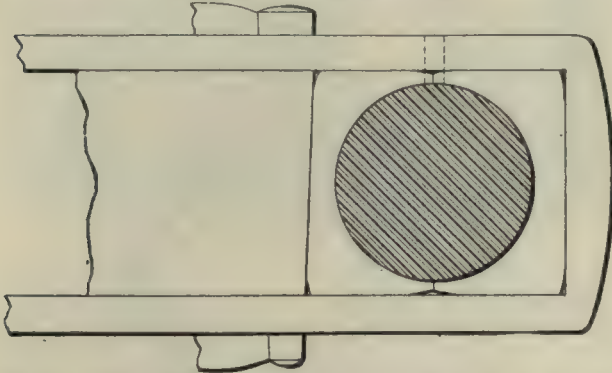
PROPER METHOD OF FINISHING CRANKSHAFT BRASSES TO PROVIDE FOR EXPANSION
